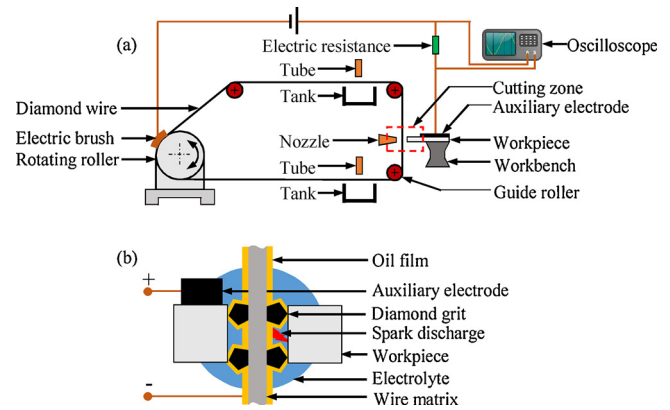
Experimental setup of shape-cutting by spark discharge-assisted diamond wire sawing: (a) experimental setup; (b) enlarged view of the cutting zone.
